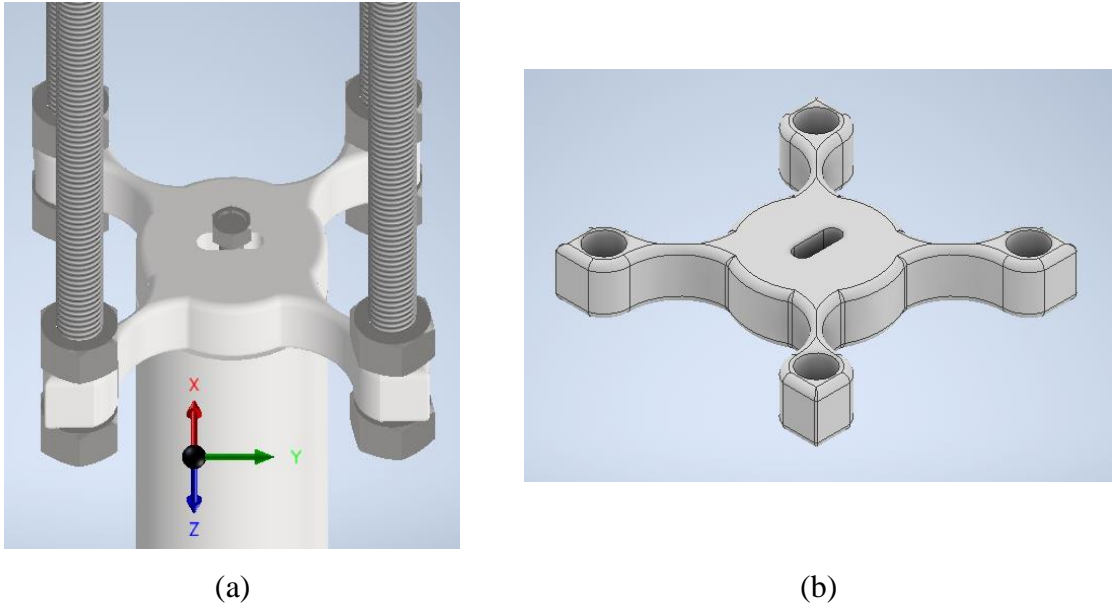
(a) Core support piece installed in the vein. (b) Core support piece.
